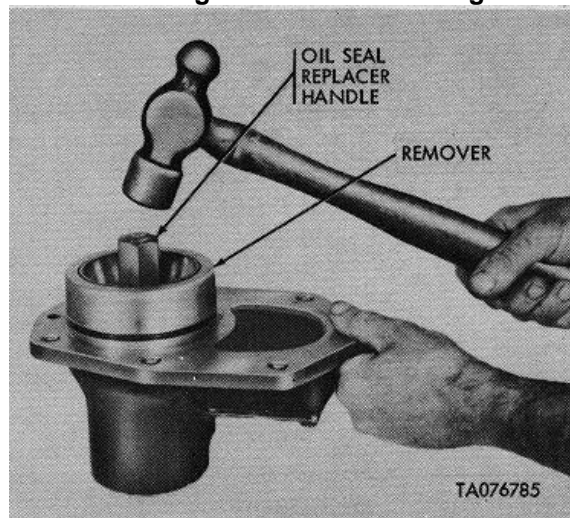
Output Shaft - Bearing Removal Using Remover with Oil Seal Replacer Handle
